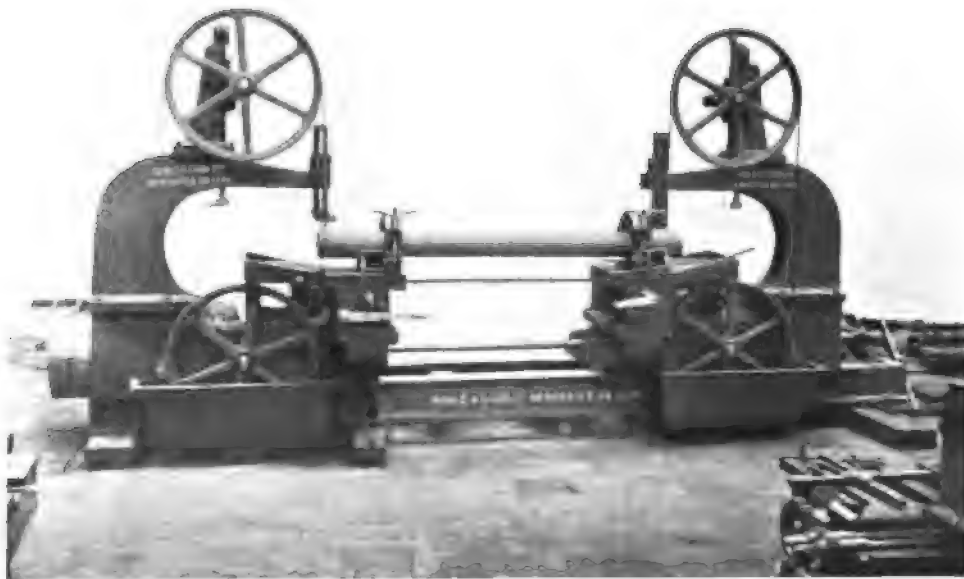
BAND SAWING MACHINE, MOUNTED ON LONG BED. (Noble & Lund, Ltd.)
